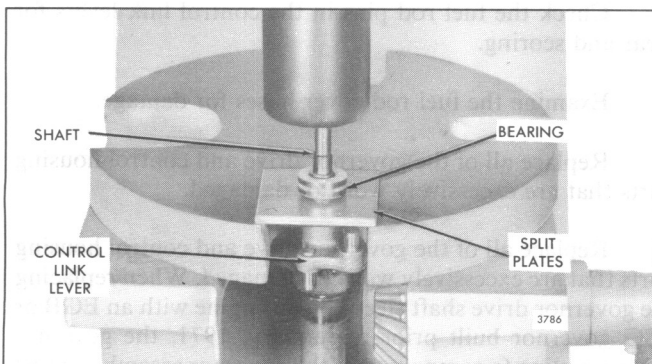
Removing Bearing from Control Link Lever Shaft
